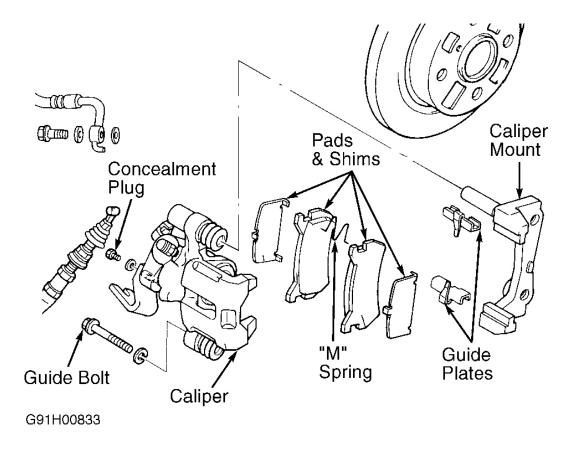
Exploded View Of Rear Disc Brake Assembly (Miata & Protege Shown; MX-6 & 626 Are <u>Similar</u>) Courtesy of MAZDA MOTORS CORP.
